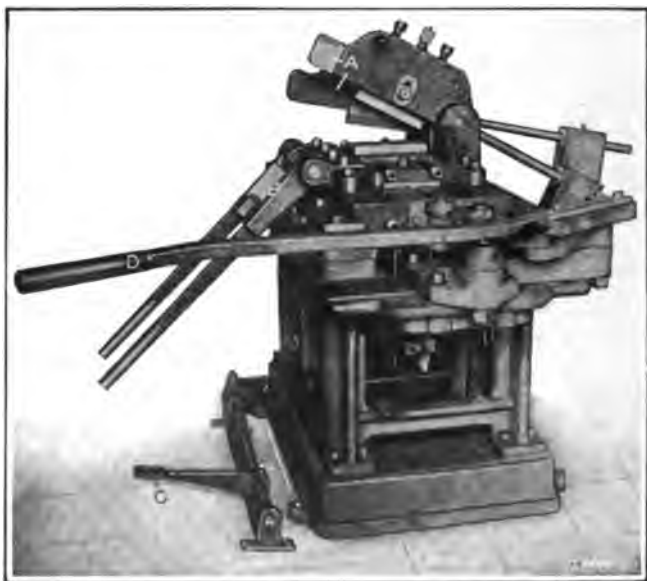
Special Electric Butt-welding Machine designed particularly for Welding such Work as Extension Taps, Twist Drills, etc.
